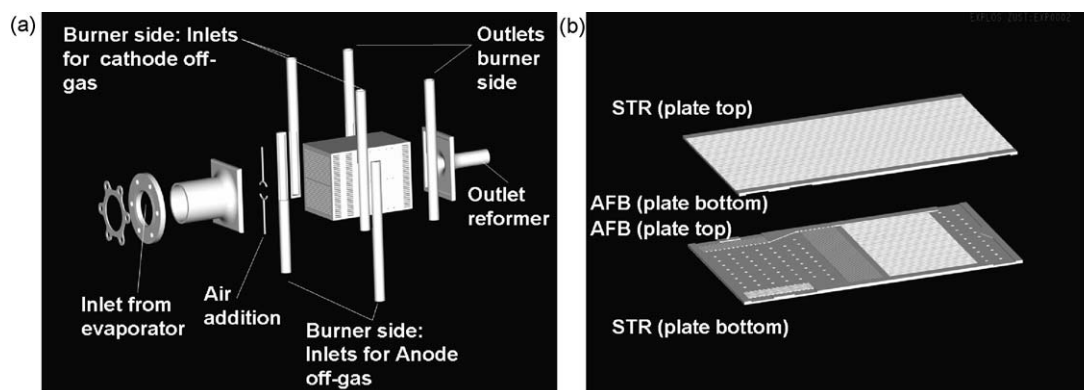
(a) (Left) Explosion view of the STR/AFB and (b) (right) sandwich design of STR and AFB plates.
